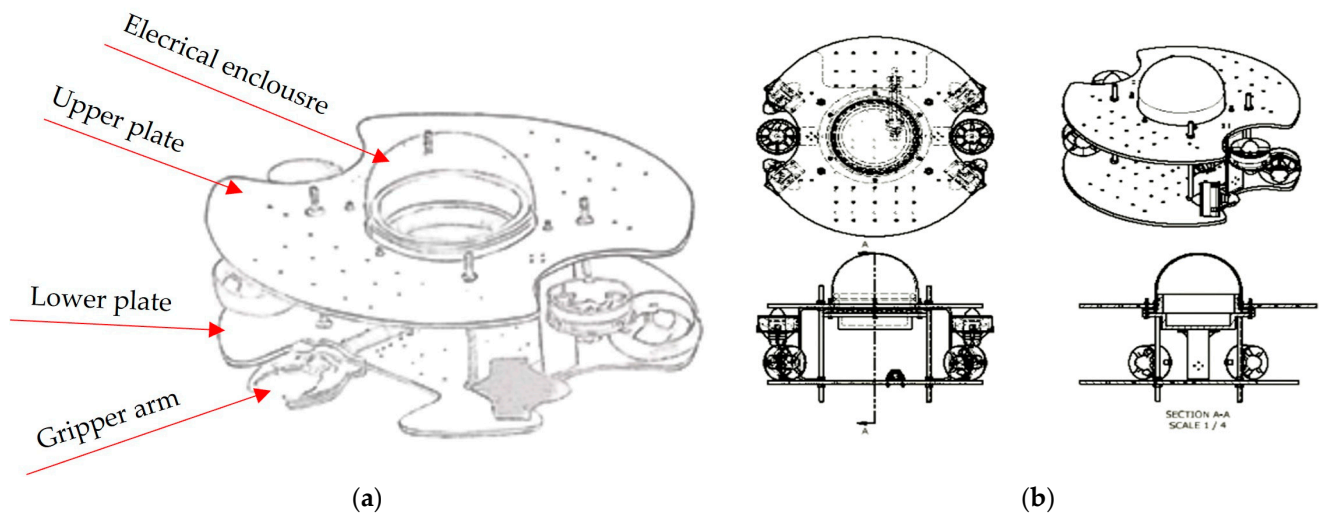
(a) First phase: free hand-sketch, (b) Final CAD views for ROV prototype.
